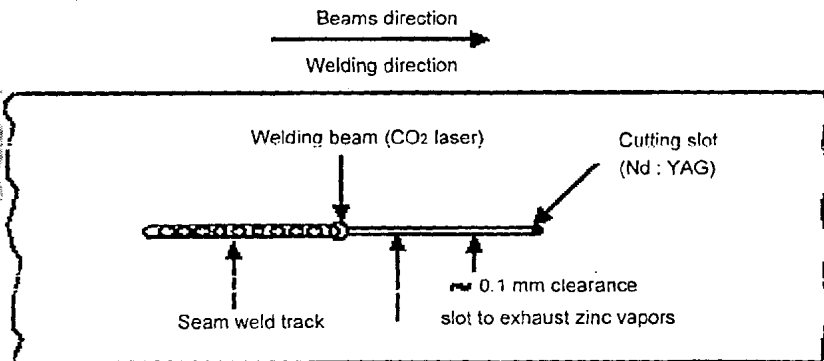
Top view of the laser lap welding using the forward slot (through both sheets).
